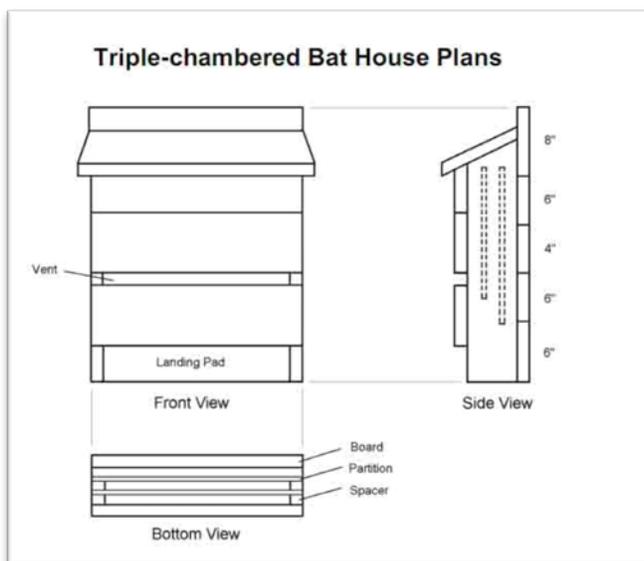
Plans for a multi-chambered bat house, courtesy of Florida Bat Conservancy
